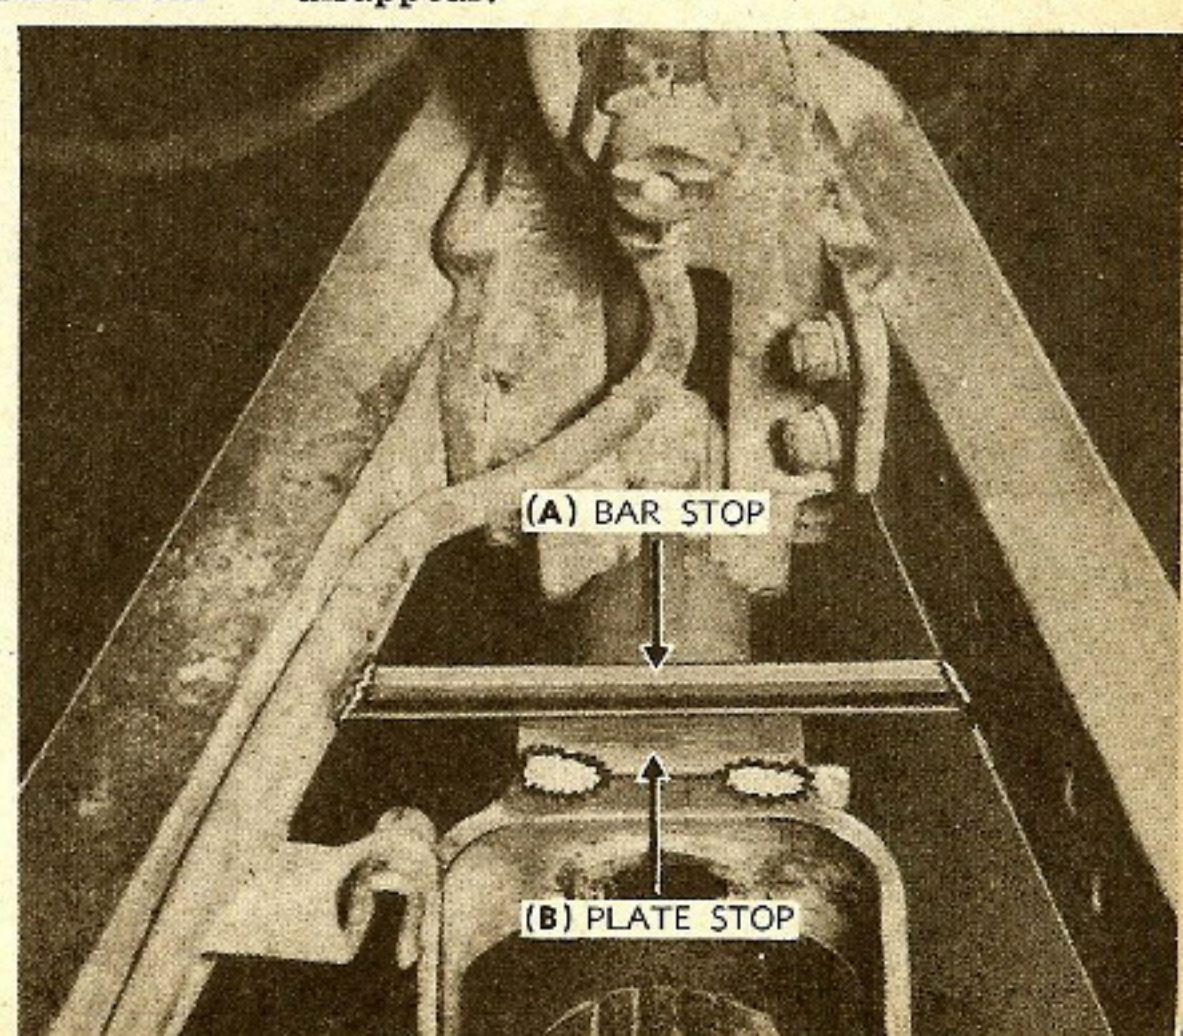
A little welding job makes it impossible to lock the landing wheel in the wrong position.
